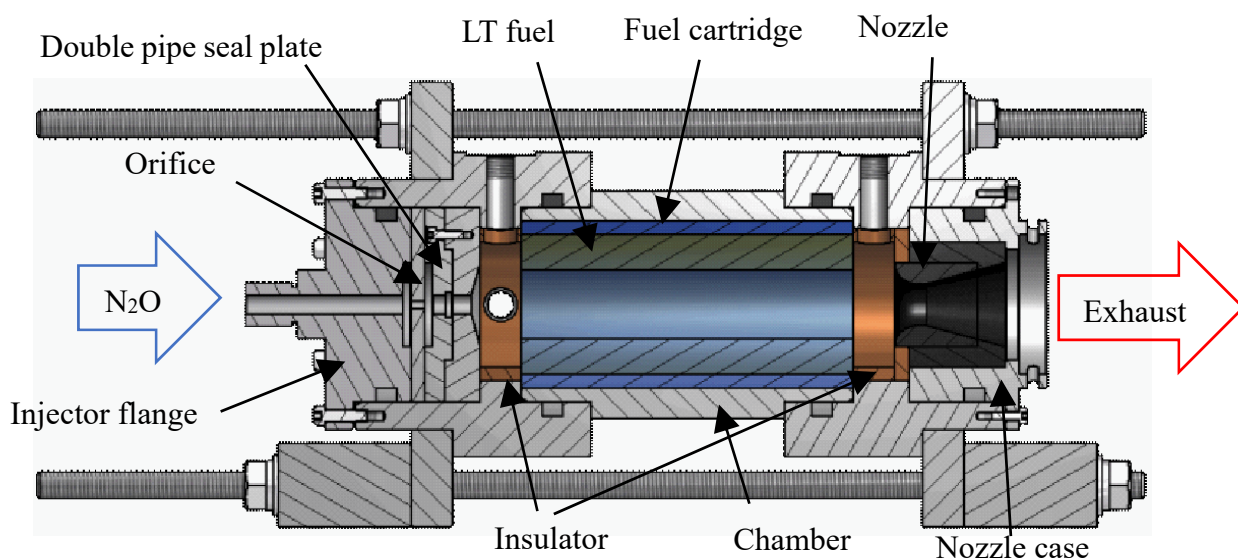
Cross-section view of a 500N thrust class test motor.
